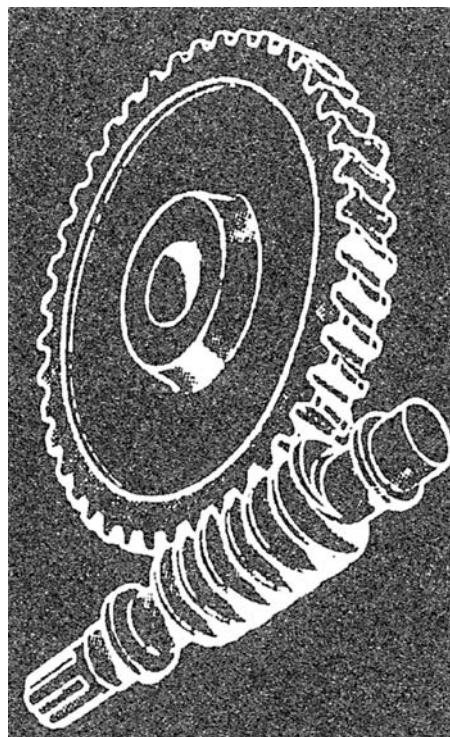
Worm gears. (Courtesy of Lubrizol Corp.)
